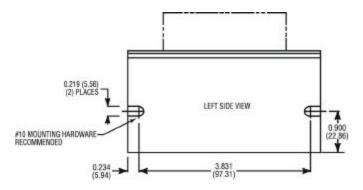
provides dimensions and mounting hole drill pattern information for the BAC1610S alternate side mounting configuration.
